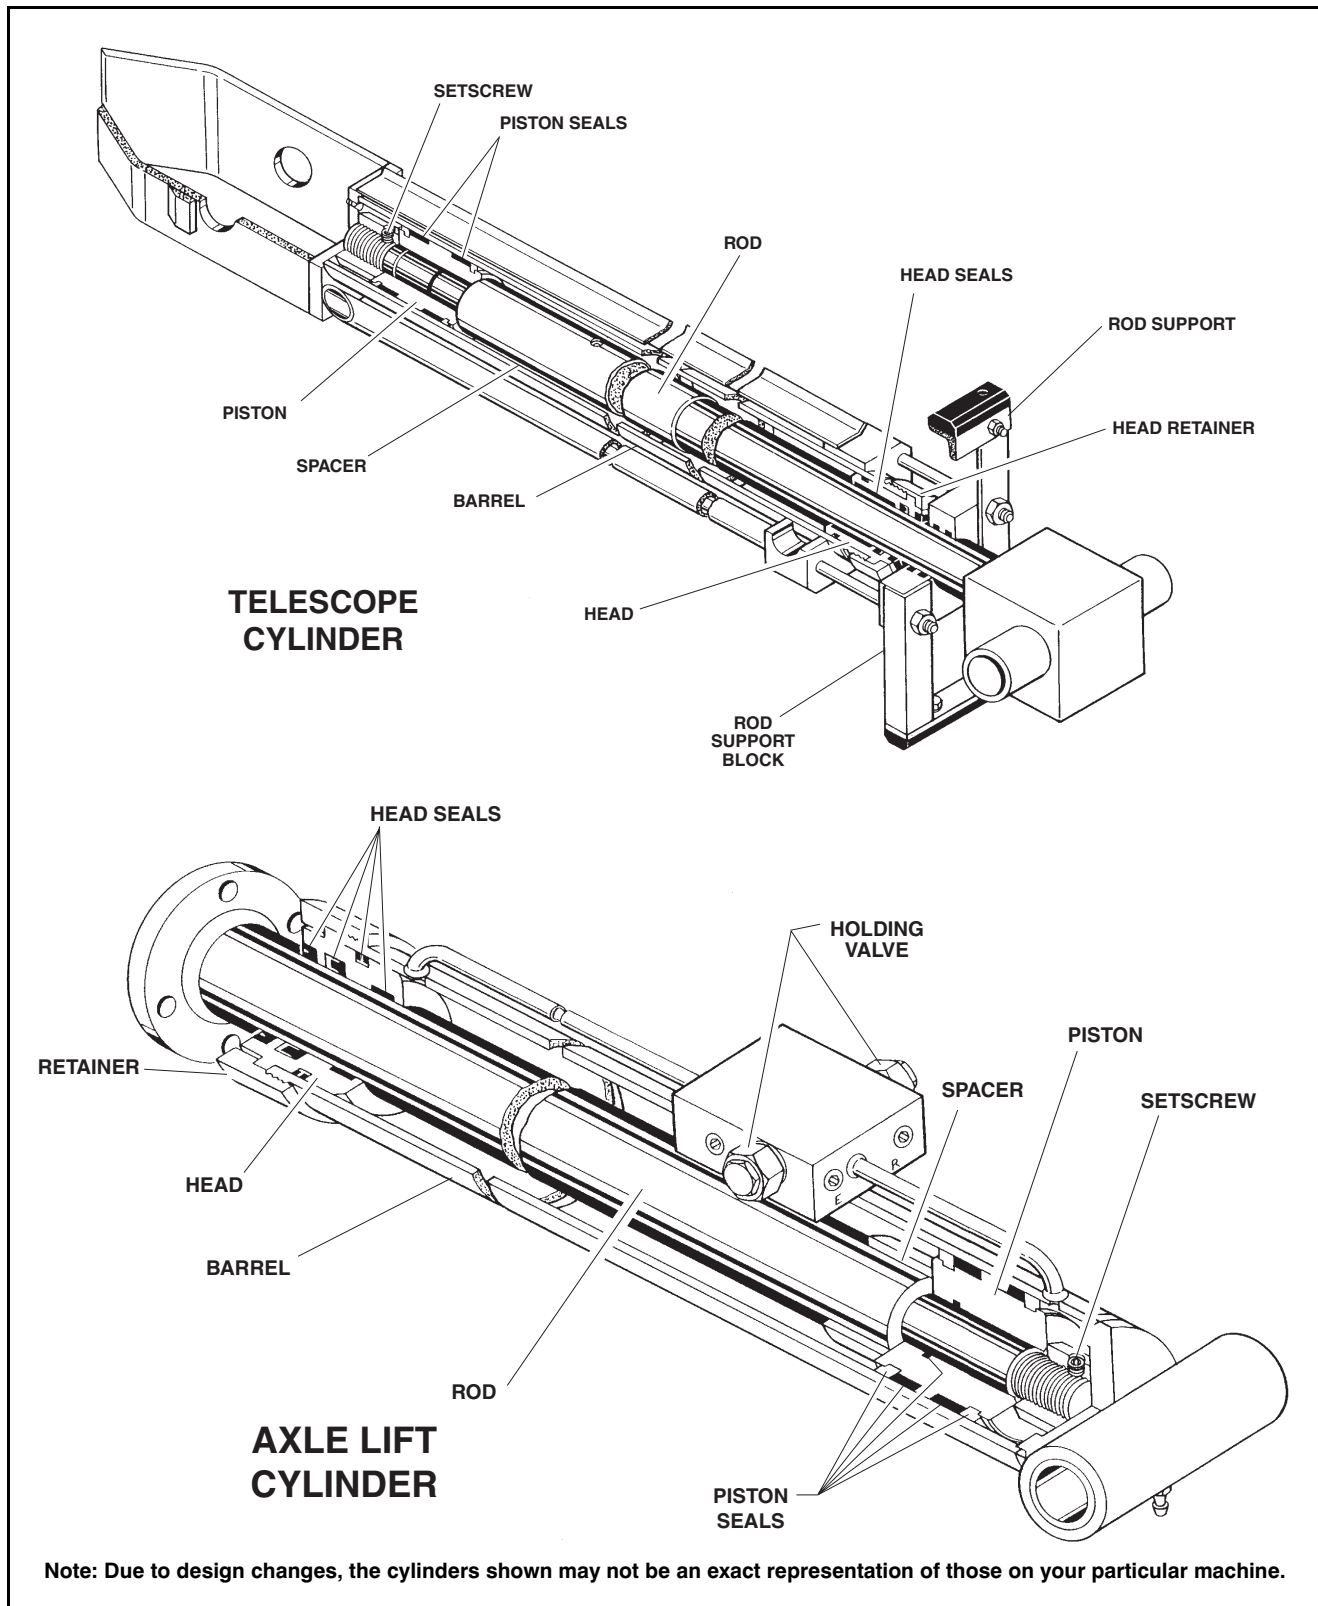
Typical Hydraulic Cylinders - Sheet 1 of 5
